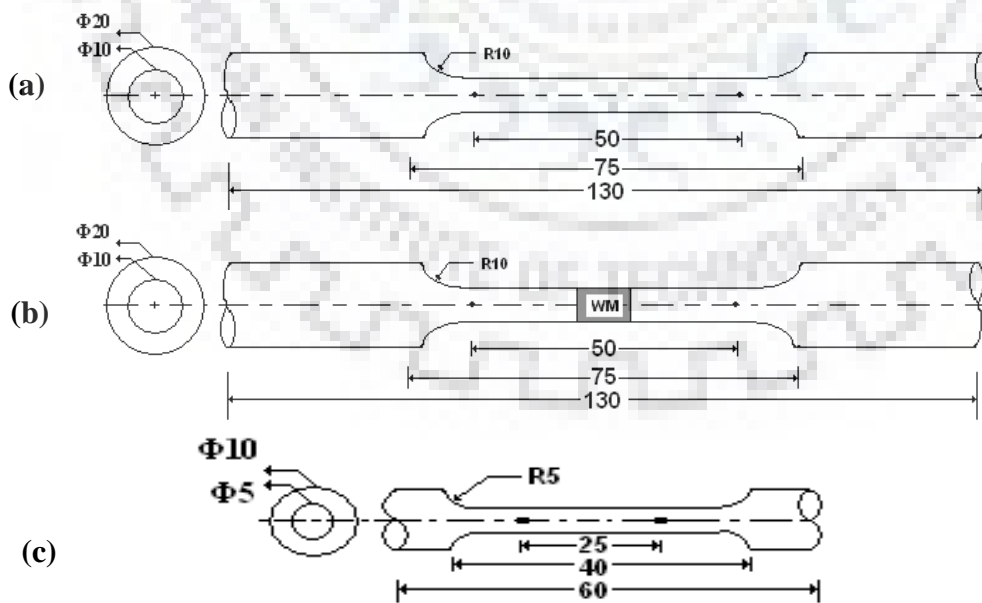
Schematic diagram of the tensile specimens (a) base metal (b) axial weld and (c) all weld metal (All dimensions are in ‘mm’)
